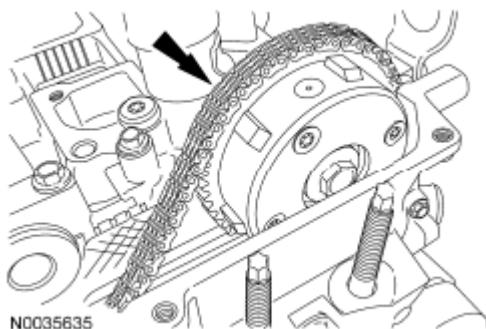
Locating Timing Chain On Camshaft Phaser & Sprocket
